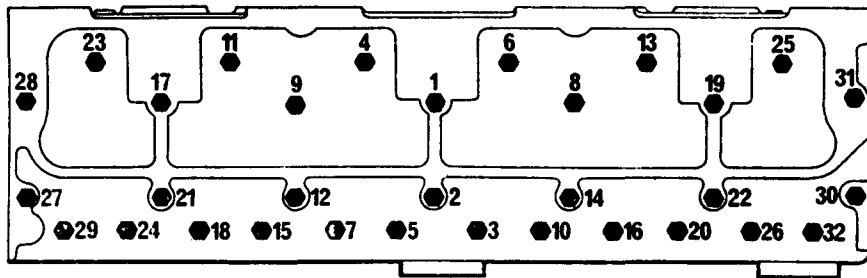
(a) Tightening Sequences for Cylinder Head Nuts and/or Setscrews
